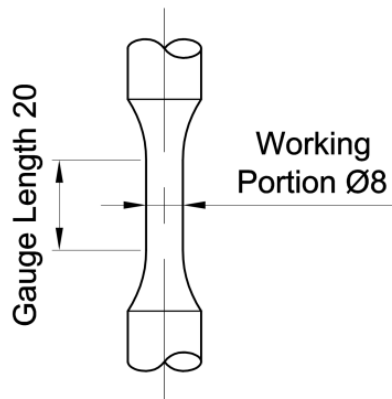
Uniaxial specimen geometry (dimensions are in 'mm').
